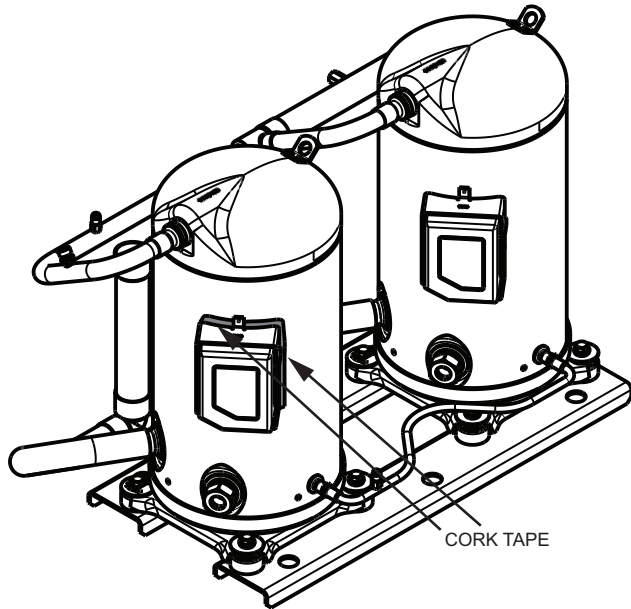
Seal Area between Terminal Box and Shell (All Compressors)
